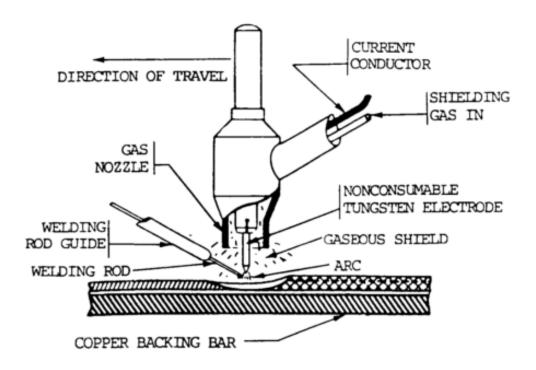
Gas tungsten arc (TIG) welding (GTAW). Figure 10-32: TIG Gas tungsten arc welding (also called GTAW)
